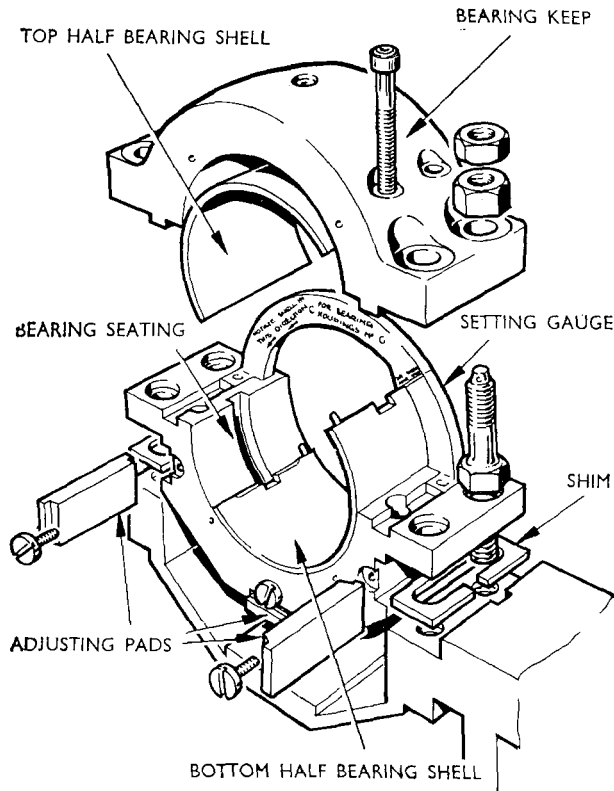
TYPICAL BEARING HOUSING SHOWING SHELL AND SETTING GAUGE
